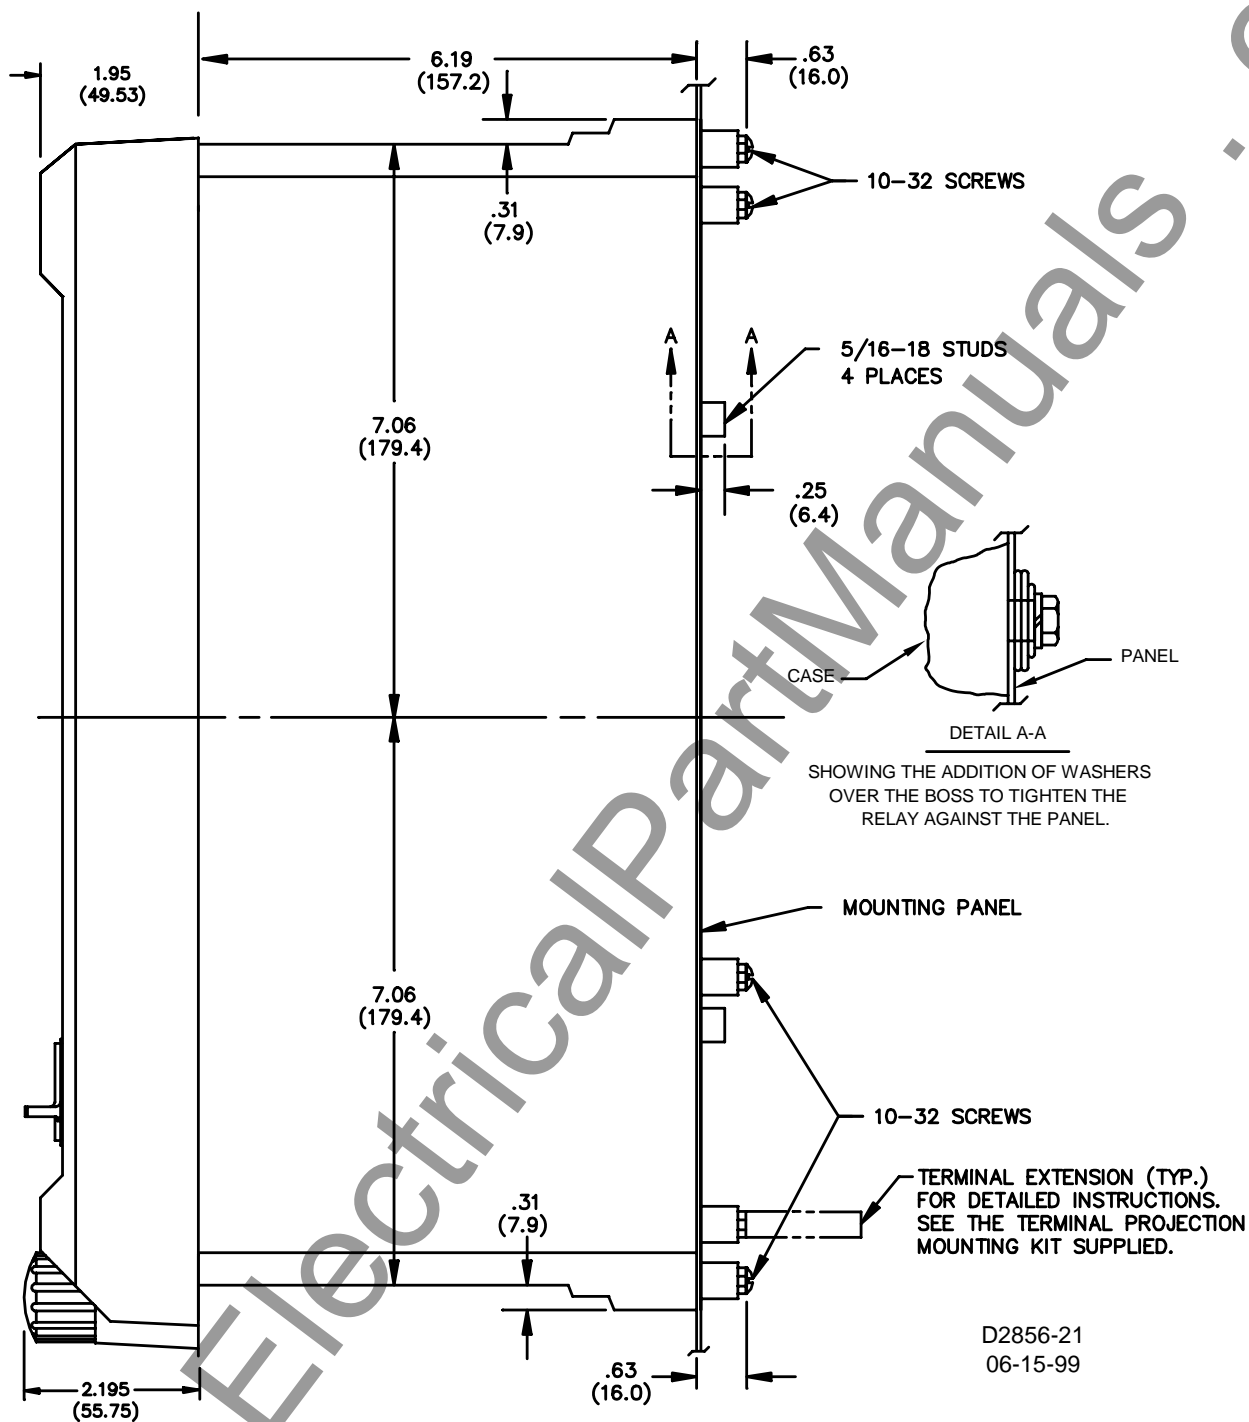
M1 Case Dimensions, Projection Mounting, Side View
